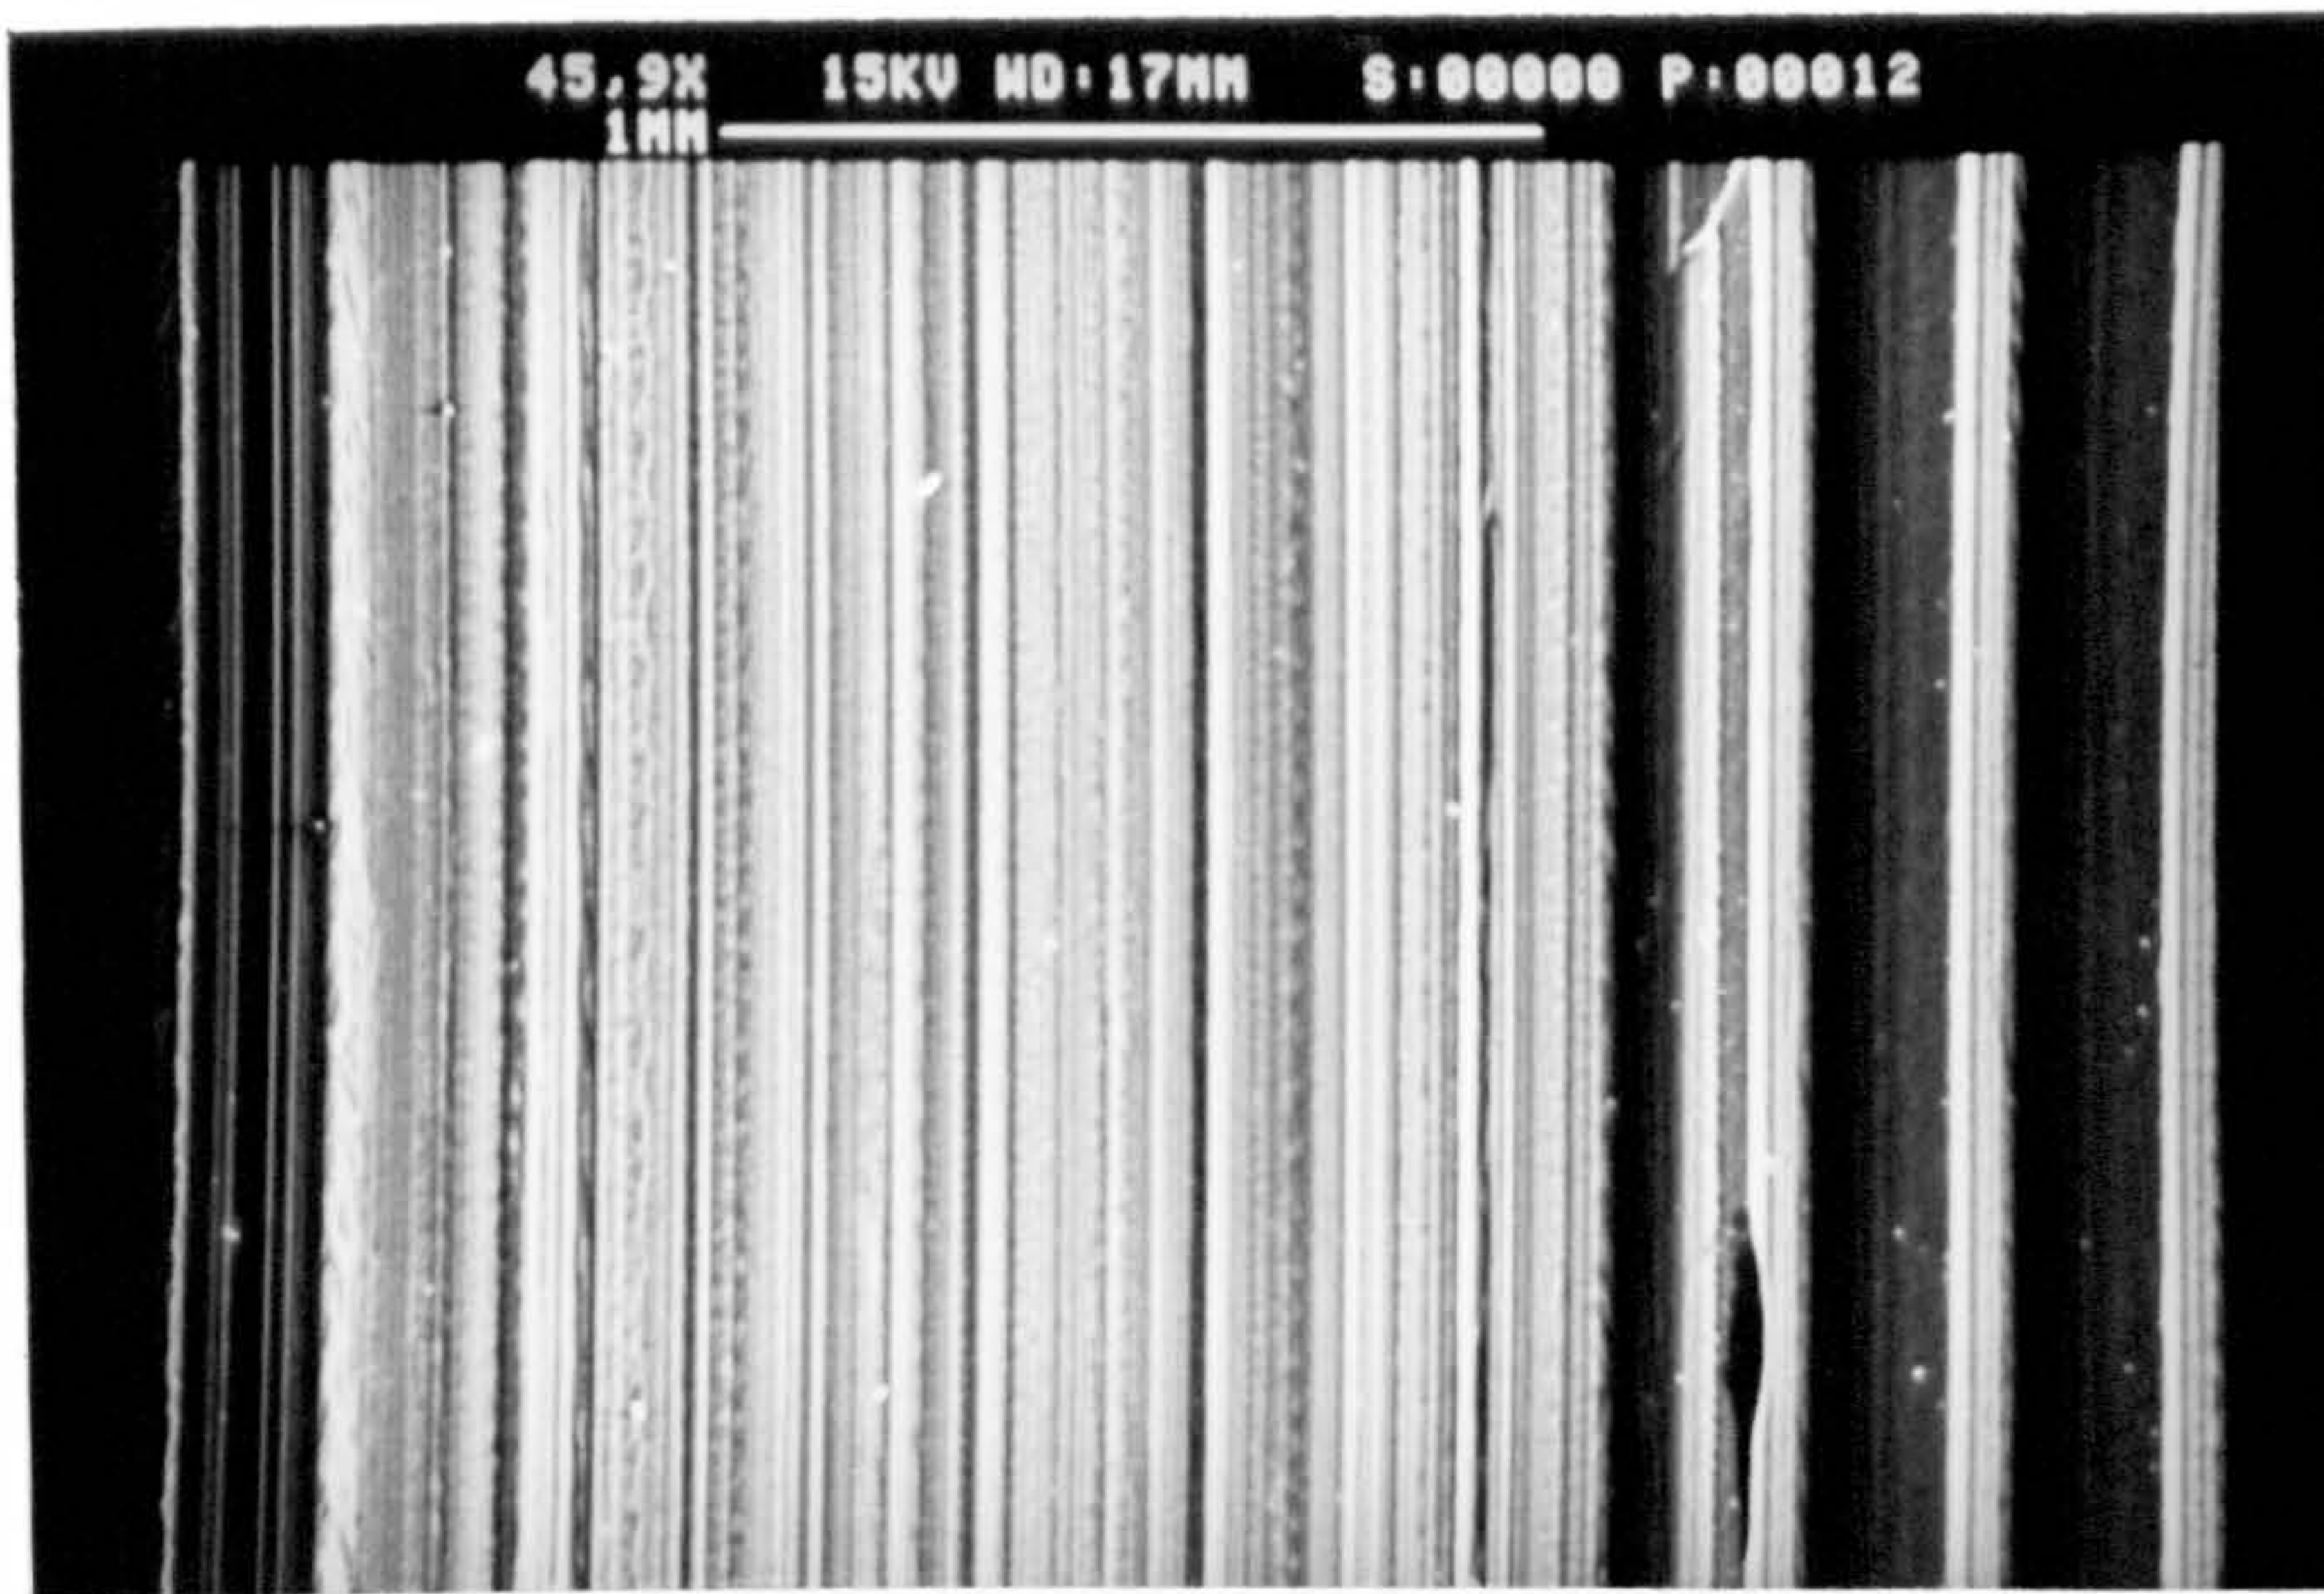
HDPE surface machined at  $0^{\circ}$  rake angle, showing groove formation. (Speed = 30 m/min, feed = 0.25 mm/rev)
